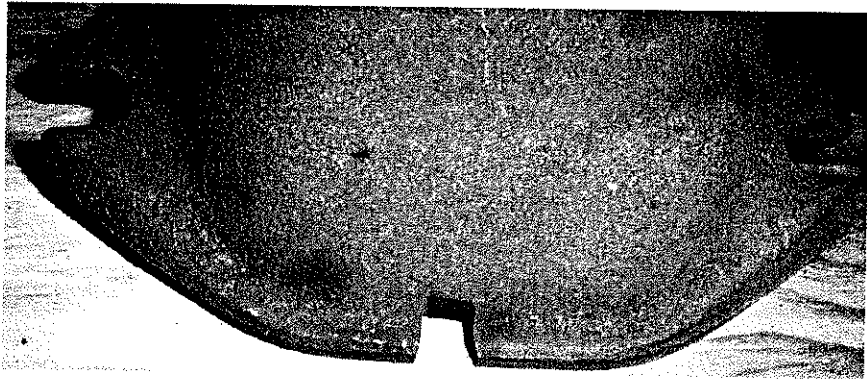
shows the Hercules crank guard with a corresponding notch machined into the lower lip to match up with the crankcase slot.
